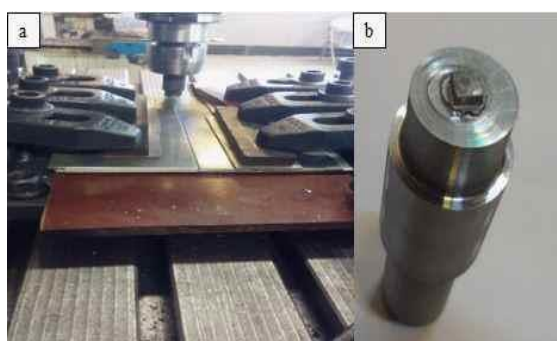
(a) friction stir welding fixture. (b) Friction stir welding tool with square pin profile
